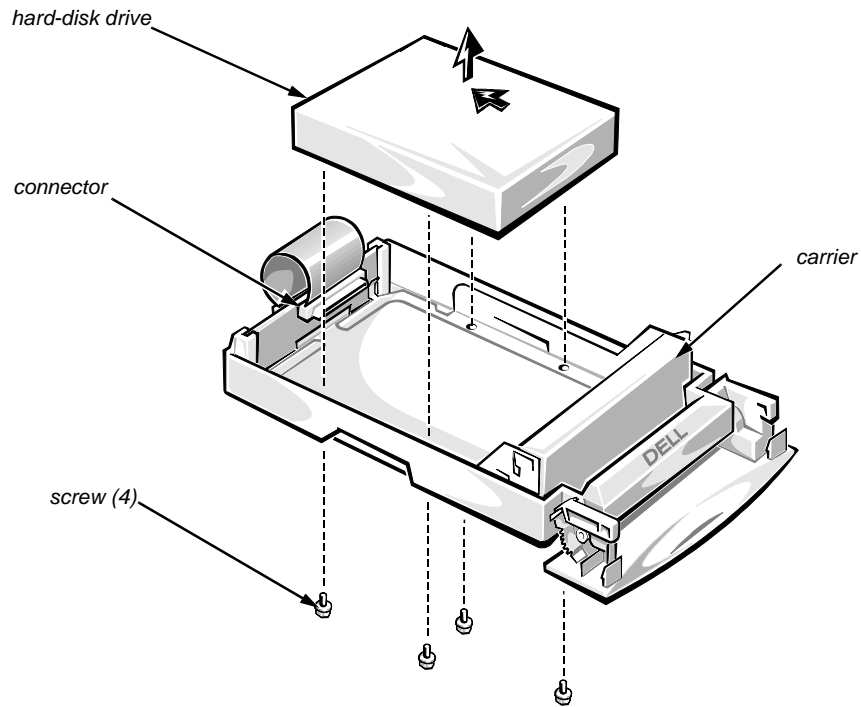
Hard-Disk Drive Carrier Removal
